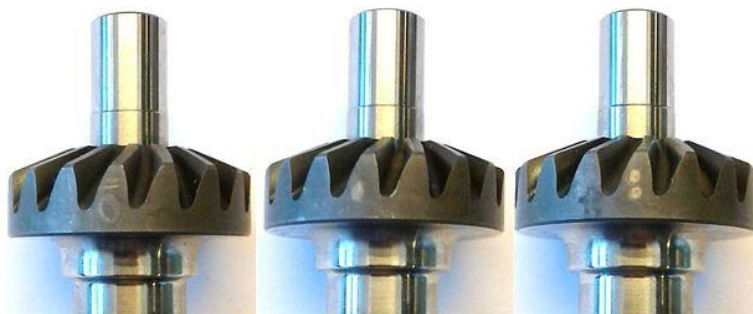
A picture of a coded gear and coded teeth: from left, gear number 30 tooth one, tooth two and tooth three, respectively.
